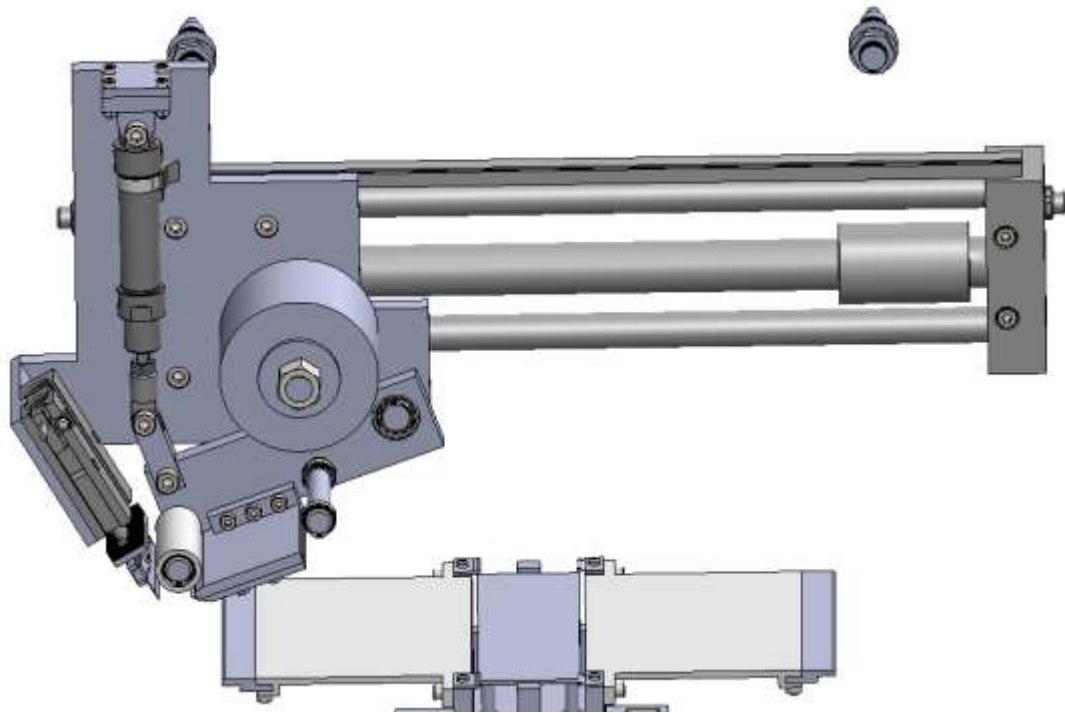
Tape and label sticking mechanism via sliding cylinder
